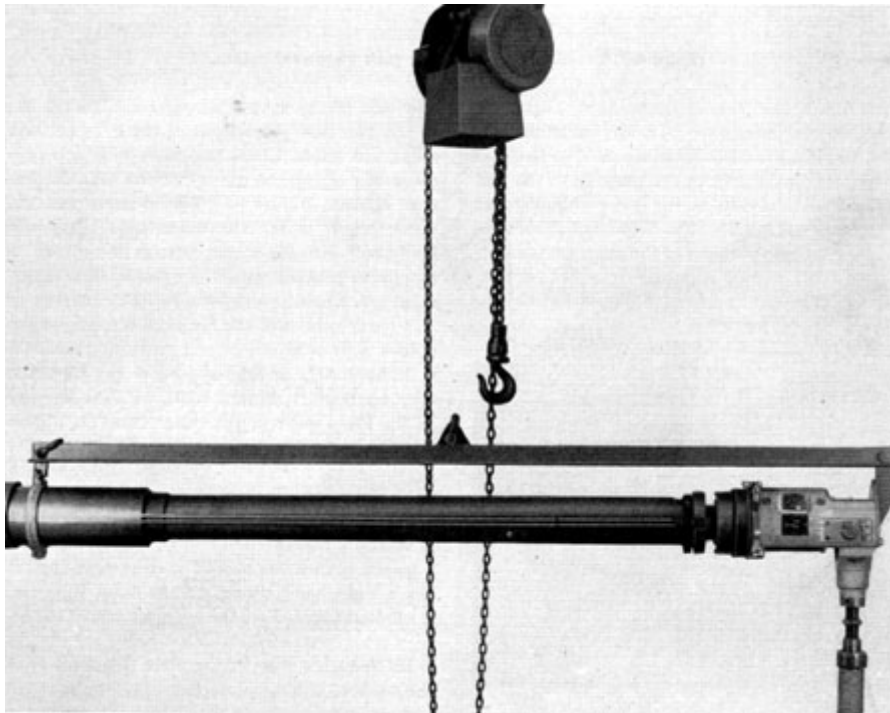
Adjustable roller stand placed under eyepiece box.
